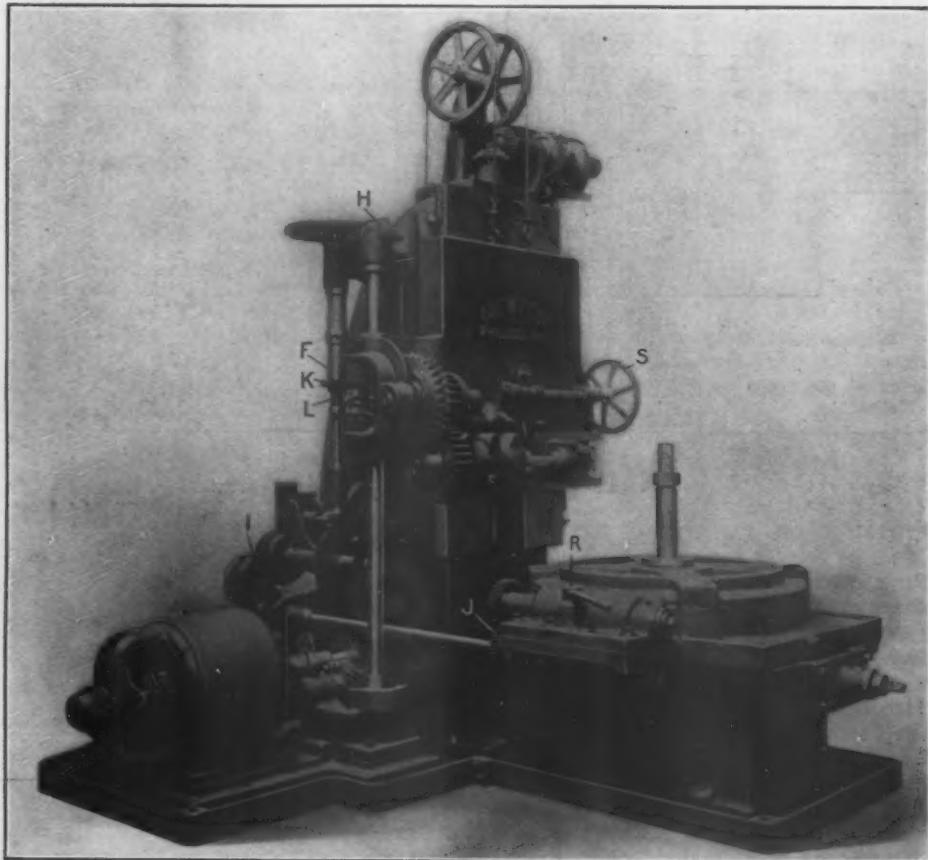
The 84-In. Rapid Production Spur Gear Cutting Machine Built by the Newton Machine Tool Works, Philadelphia, Pa.
